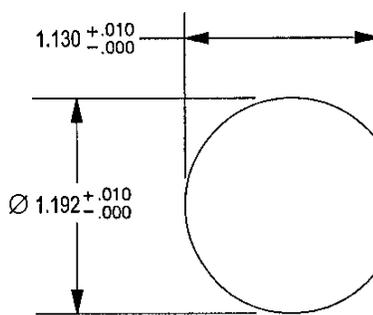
MOUNTING HOLE DIMENSIONS, SHELL SIZE 23
